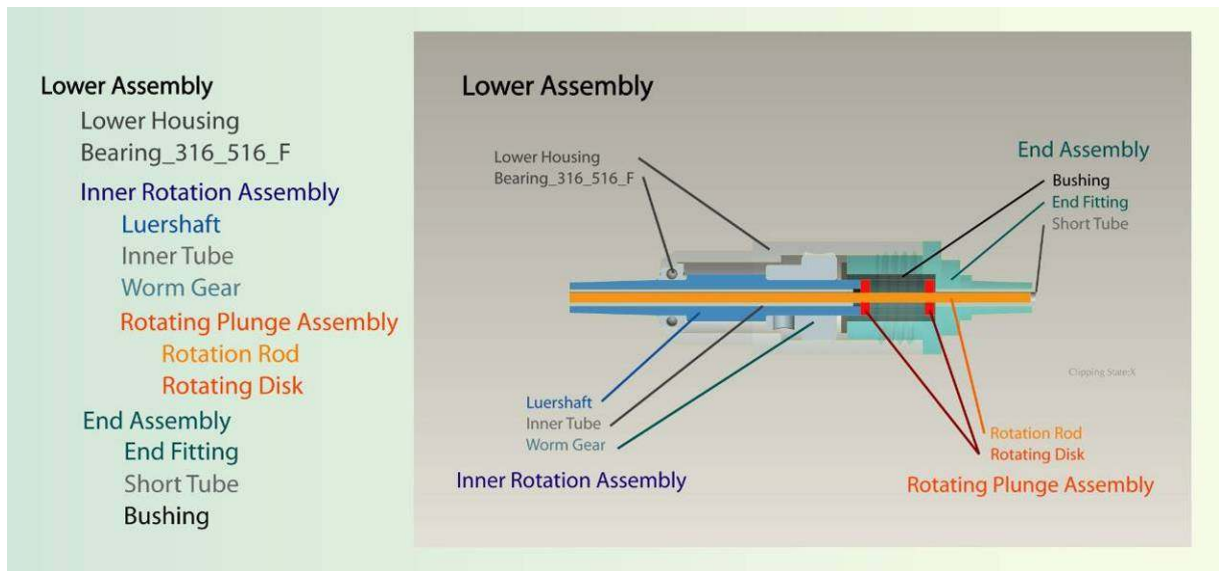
Lower housing of the mechanical controller with rear linear actuator connection. The direct drive mechanism (orange rod and red stopper) and rotational system (worm gear in gray) are displayed. The “End Assembly” displayed here is for luer connection to a manual linear actuation via a tether-cable system.
